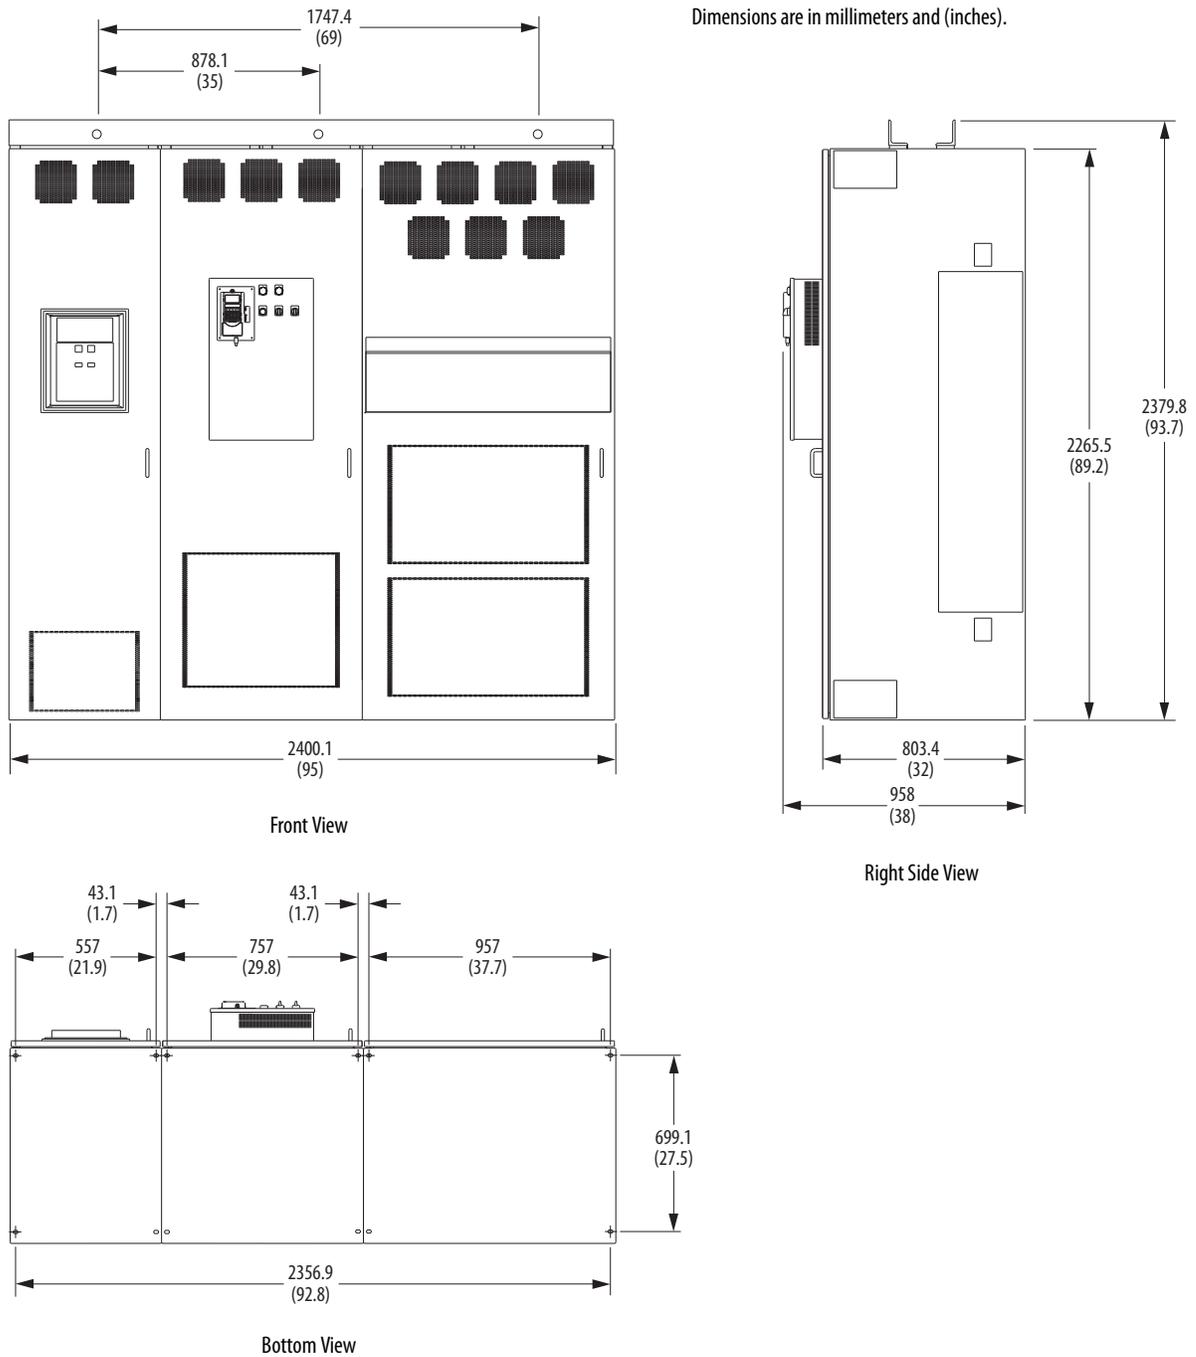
AFE Frame 10 in IP20 2500 MCC Style Enclosure Dimensions
